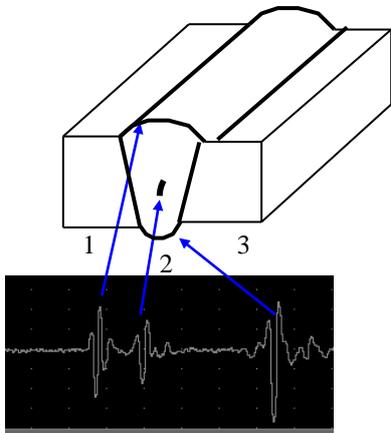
A scan obtained from an internal flaw of the V groove weld.
